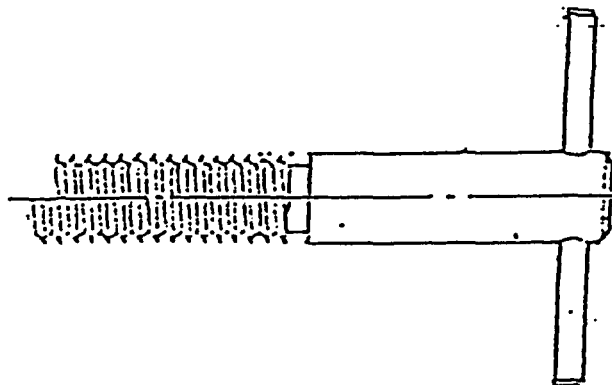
Type III, Class 2, Style B, mandrel inserting tool for 9/16 (.5625) inch and larger unified coarse thread series
